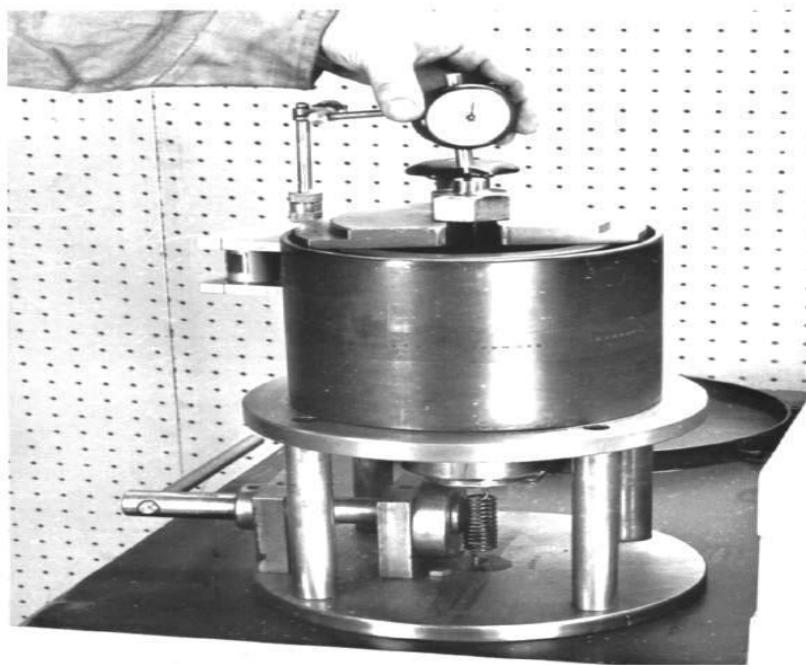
(a): Fixture for checking Bench lateral (recommended method)
